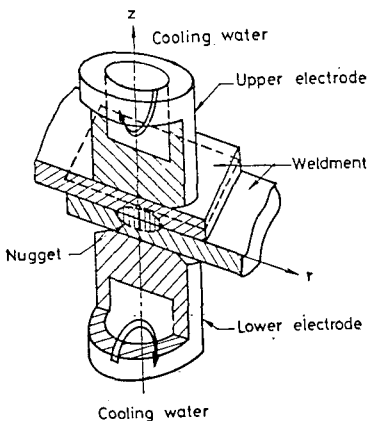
Schematic diagram of the resistance spot welding
